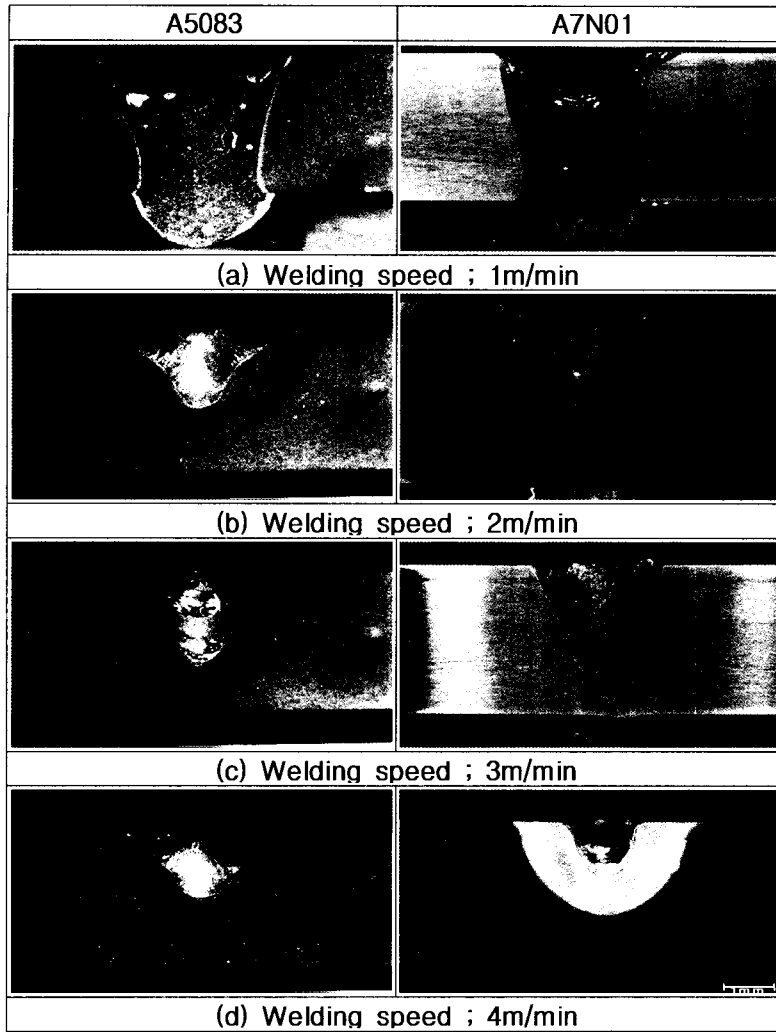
Cross sections of bead on plate welds with welding speed at laser power, 6kW
